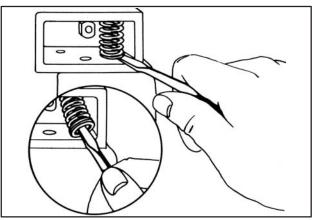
REMOVING VALVES AND REPLACING VALVES
